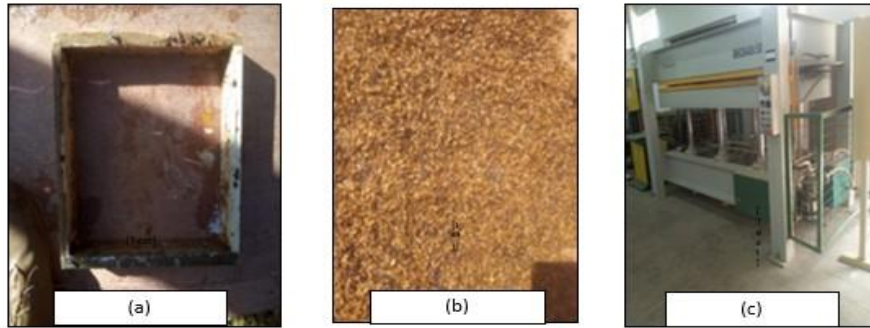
(a) wooden mold, (b) Coffee husk chips and (c) Hydraulic pressing machine.
